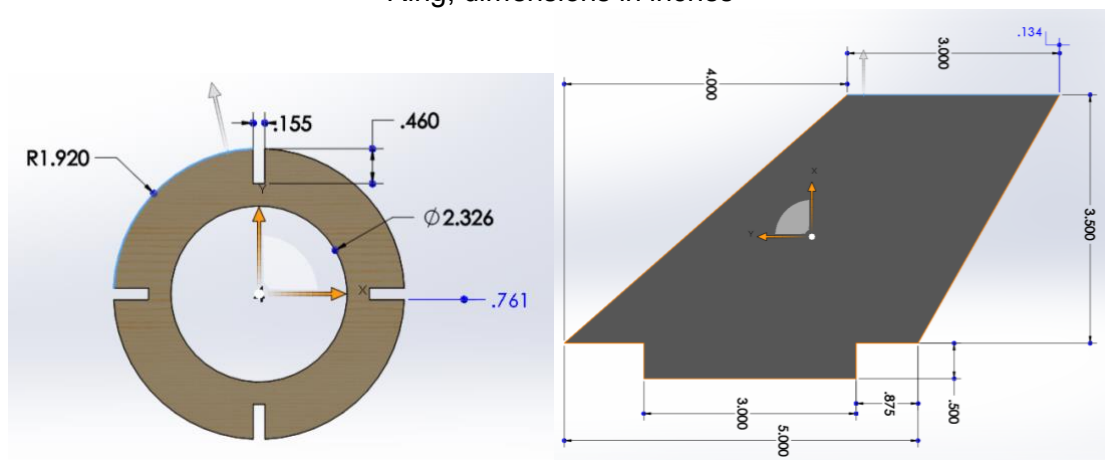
Left - Top Part of Nosecone (ABS); Right - Bottom Part of Nosecone (PLA); dimensions in inches
